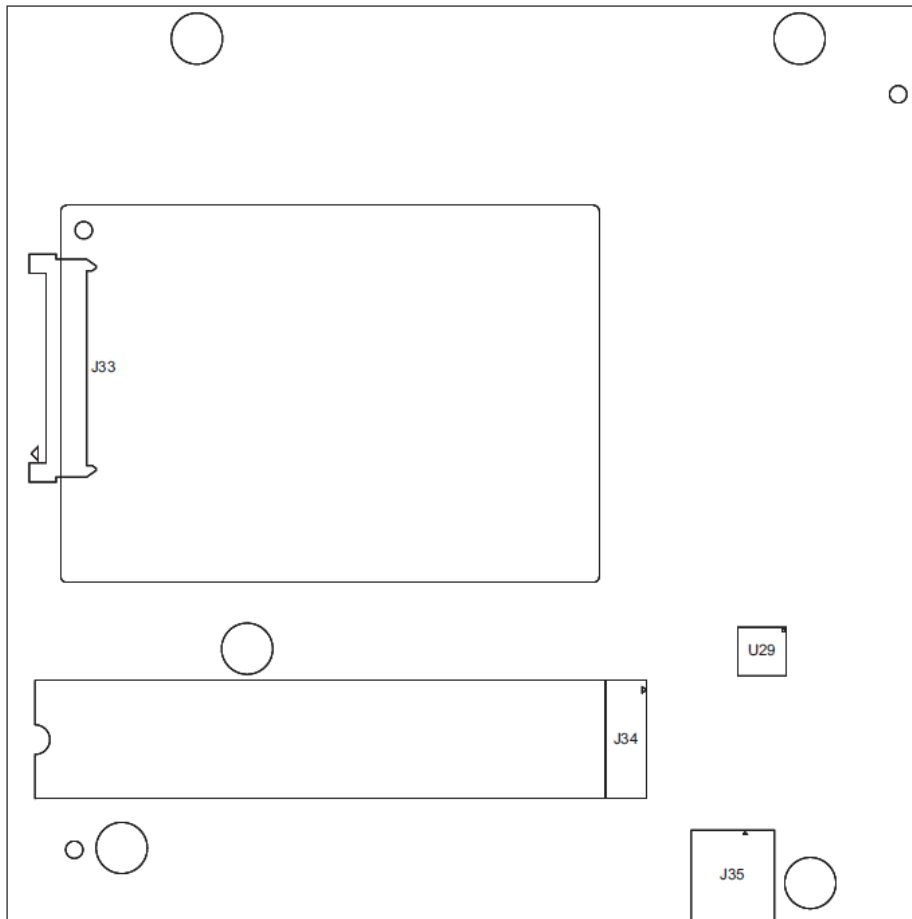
COMe Ref. Carrier-i T6 TMIP Layout - Bottom View
